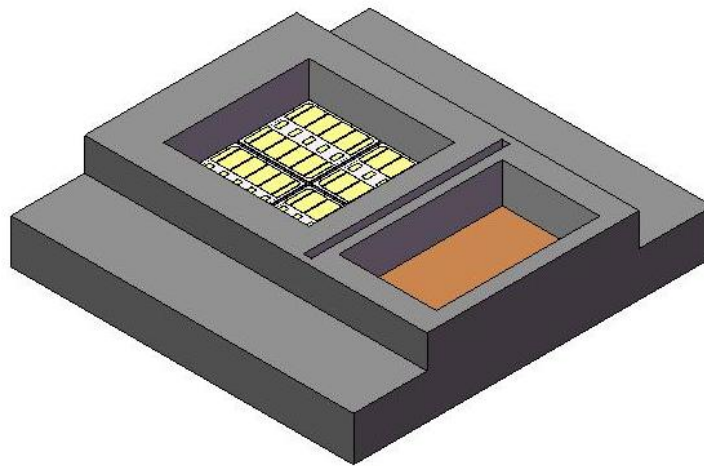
Three-dimensional model of the SiC SGTO package and die.
